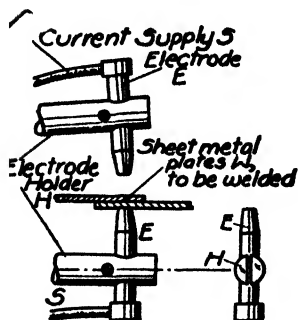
Spot-welding; Work-setting Stage.
